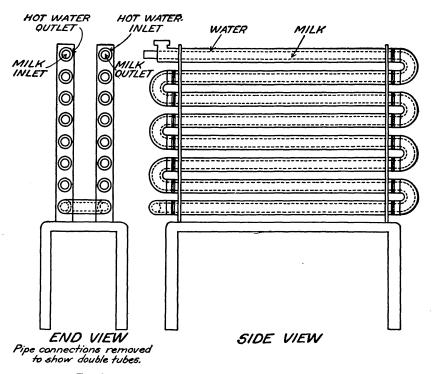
A double-tube milk heater. (See also figure 28.)
